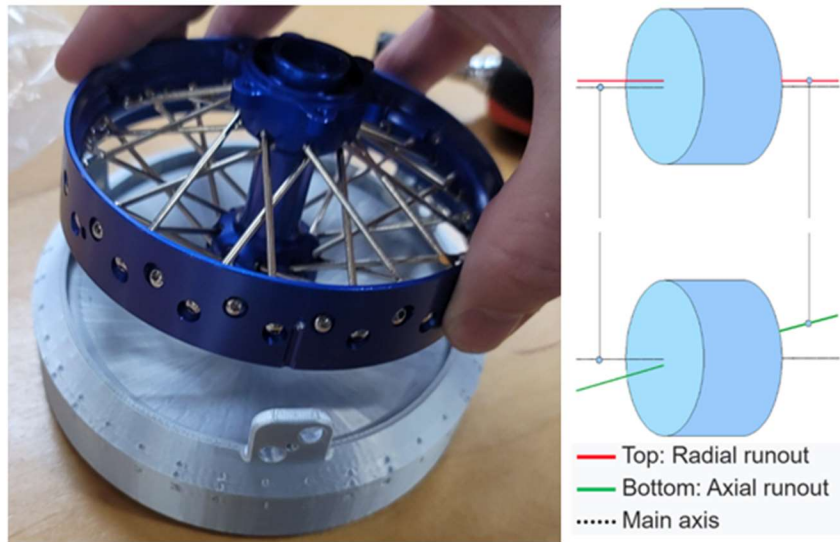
Removing wheel from fixture and radial vs axial runout (<https://en.wikipedia.org/wiki/Run-out>)
